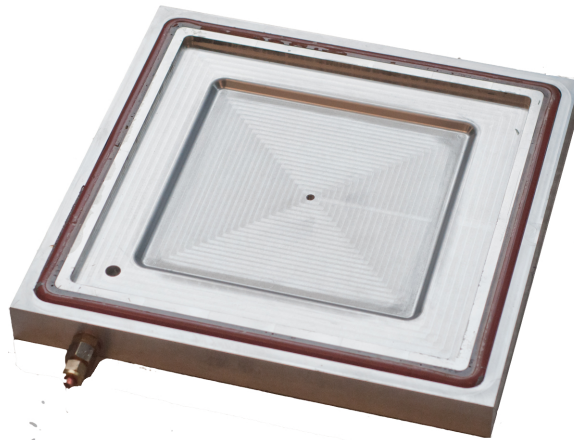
The sandwich plate tool and O-ring can be seen in the figure. The cavity for the core is the difference from the flat plate tool.
